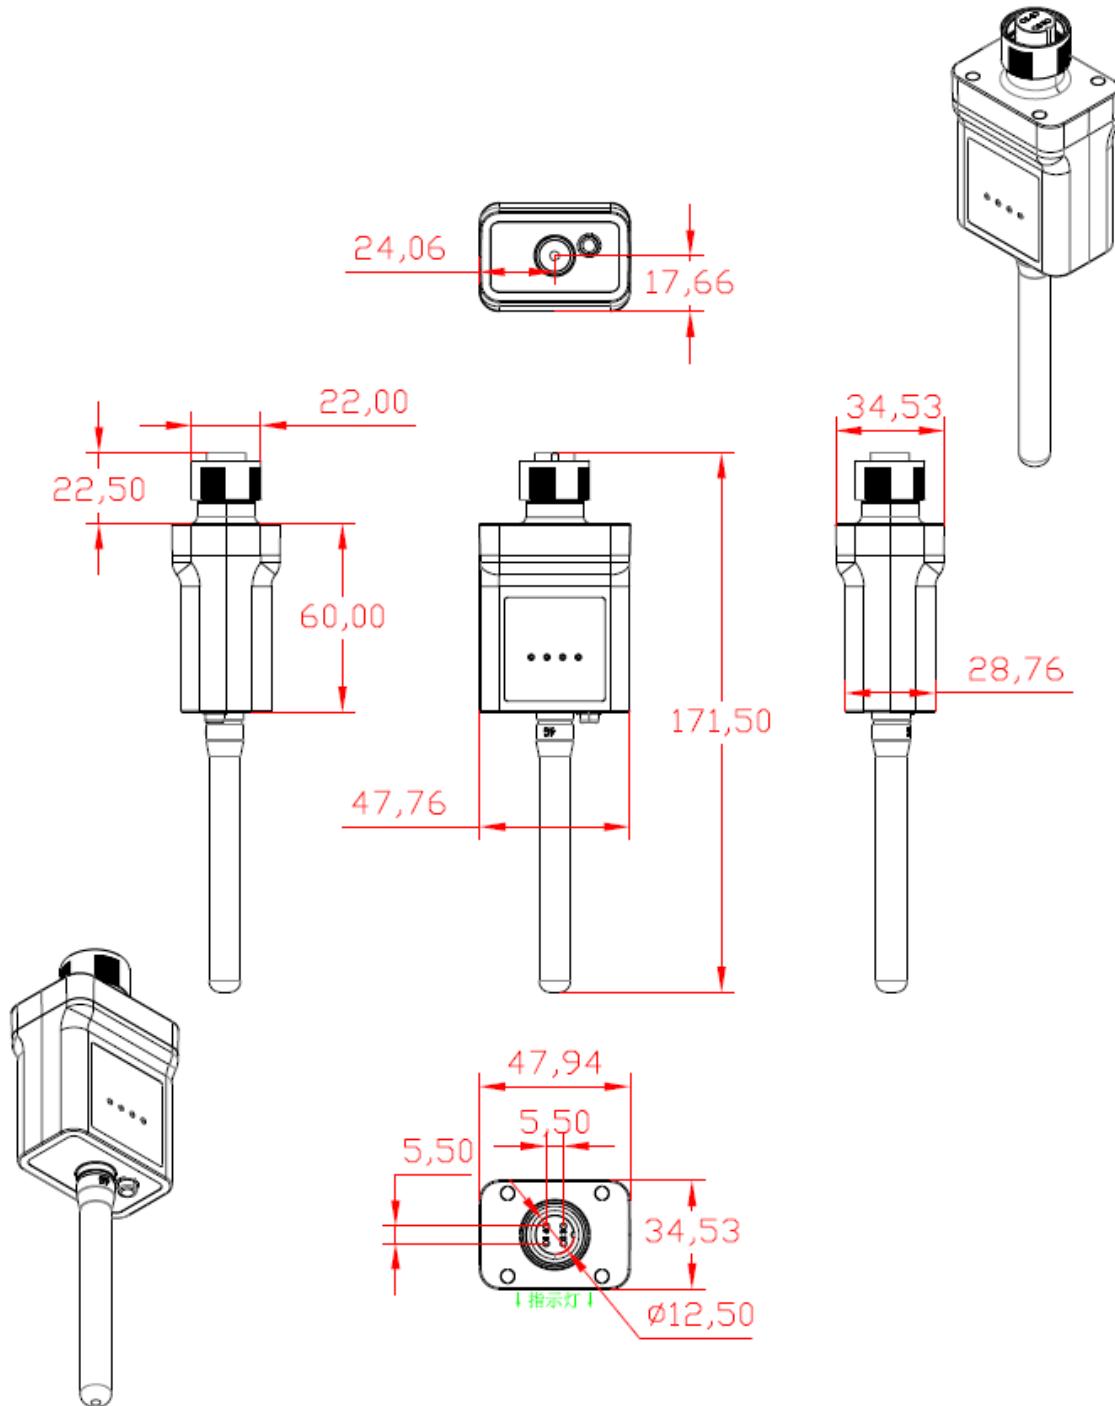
Solar Plug-SGB1-20 Mechanical Dimensions
